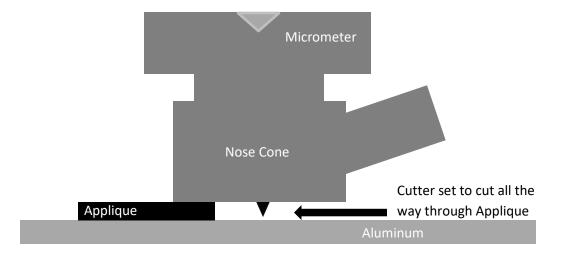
Illustration of setting .015 FLX Cutter to cut applique. (Side View)
